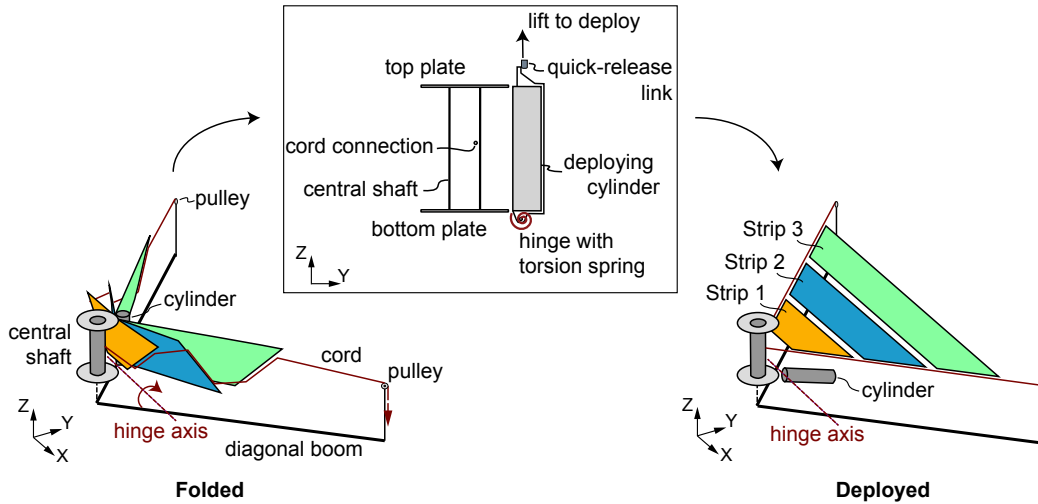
Deployment mechanism and structure in folded and deployed configurations, along with a schematic of the cylinder and hinge assembly. Strip 1 of the structure is shown in orange, Strip 2 in blue, and Strip 3 in green.
